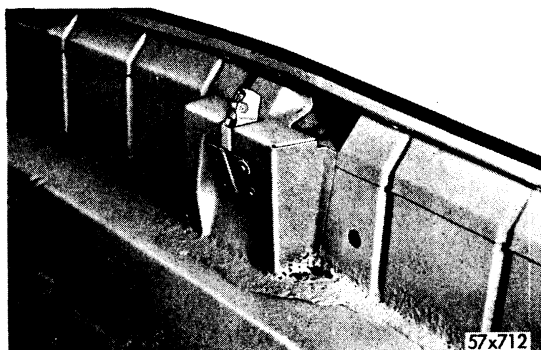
Adjusting Rear Deck Lid Latch (Imperial)
